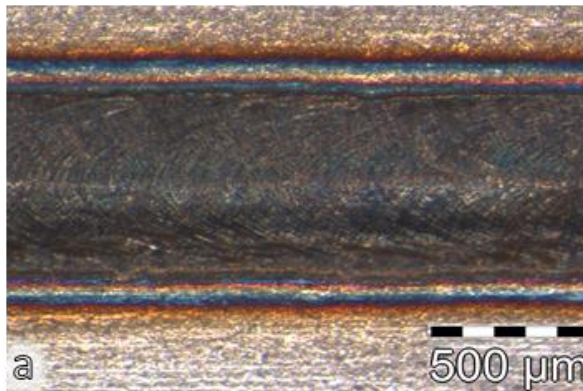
Surface of a typical weld for performed with a three spot pattern in stainless steel.
